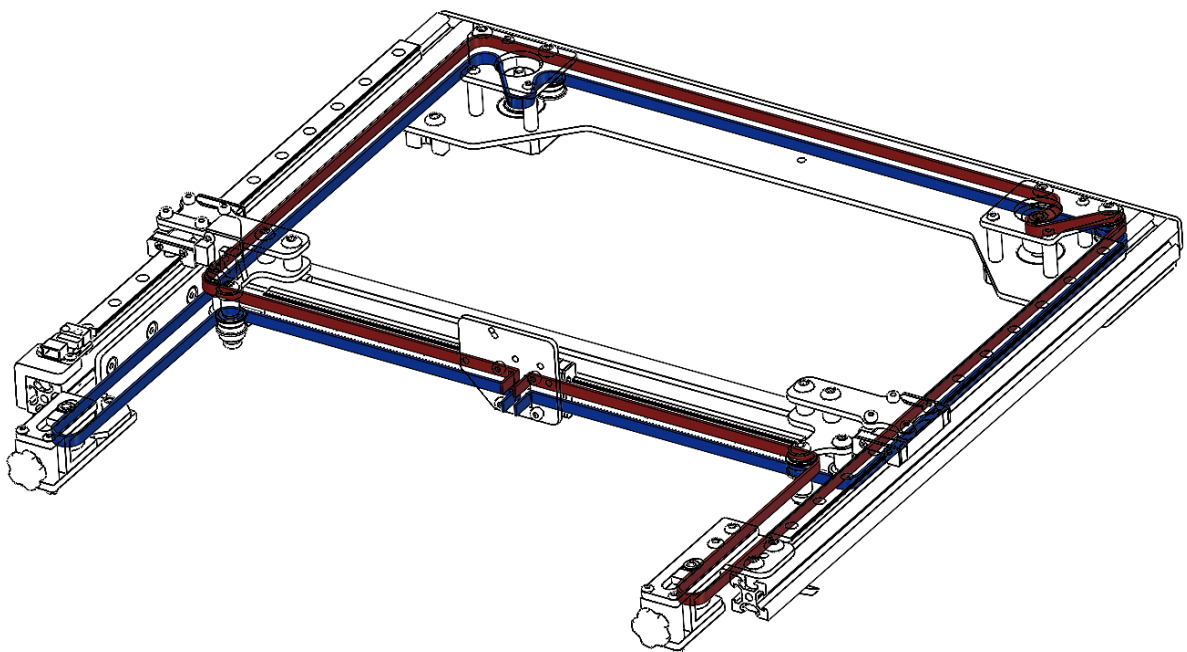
Belt Scheme, Blue: motor A, Red: motor B
